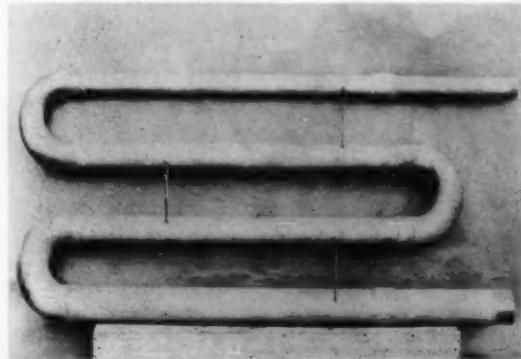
Radiant tubes, made of type HT alloy castings, are used in heating the gas carburizing furnace.
